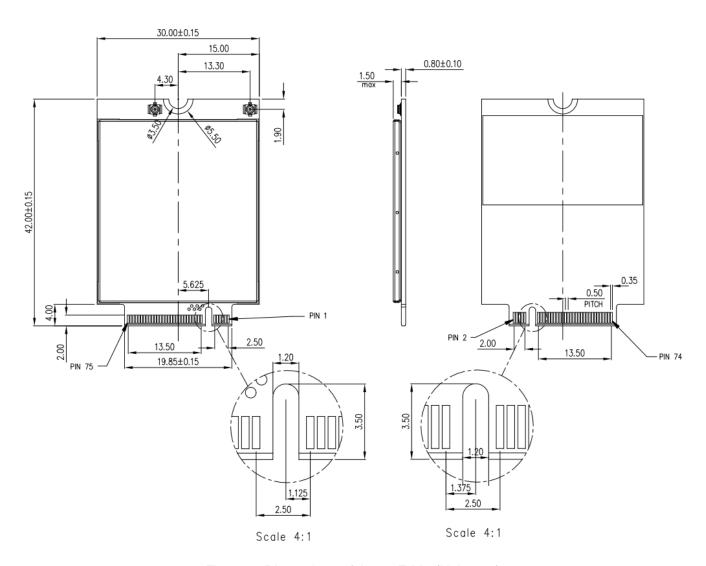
Dimensions of A7906E-M2 (Unit: mm)
